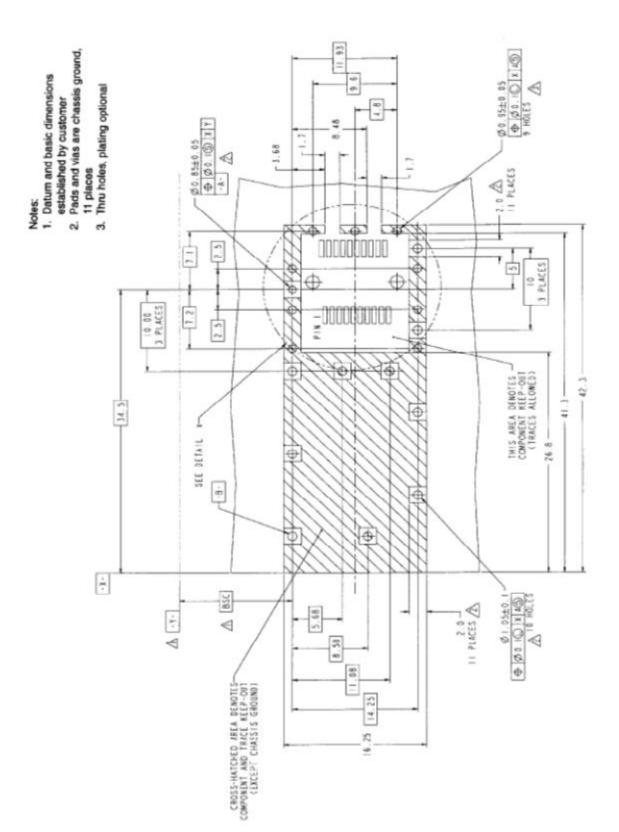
Recommended Board Layout Hole Pattern and Panel Mounting
